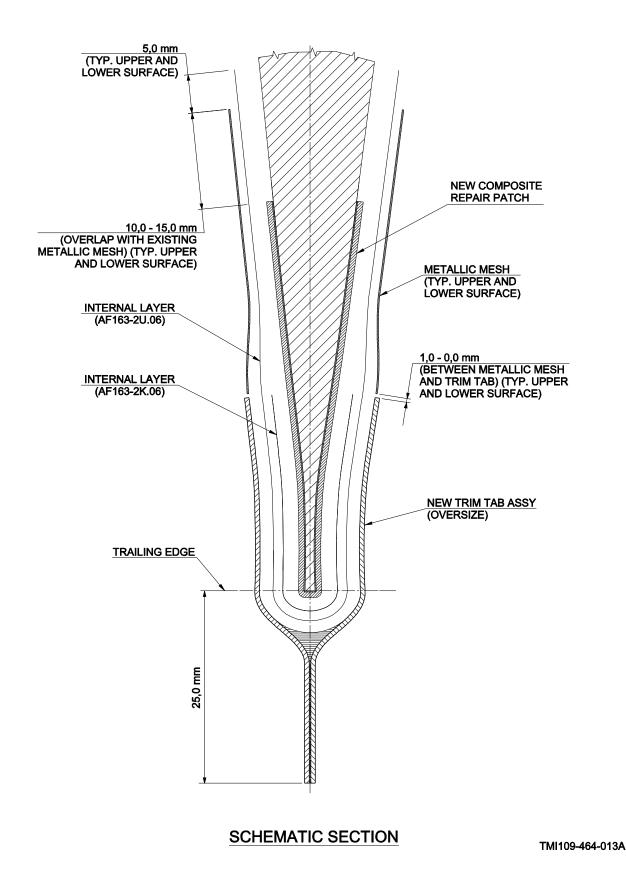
Main rotor blade - Replacement of the trim tab (assembly installation on repaired blade skin) (sheet 2 of 2).
